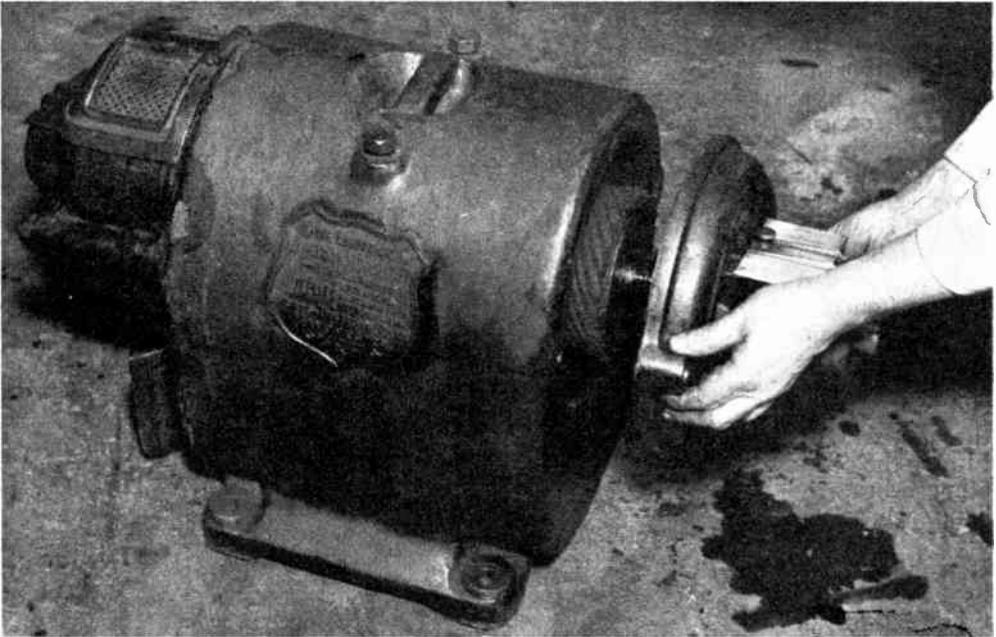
REMOVING THE END PLATE OF A MOTOR.
